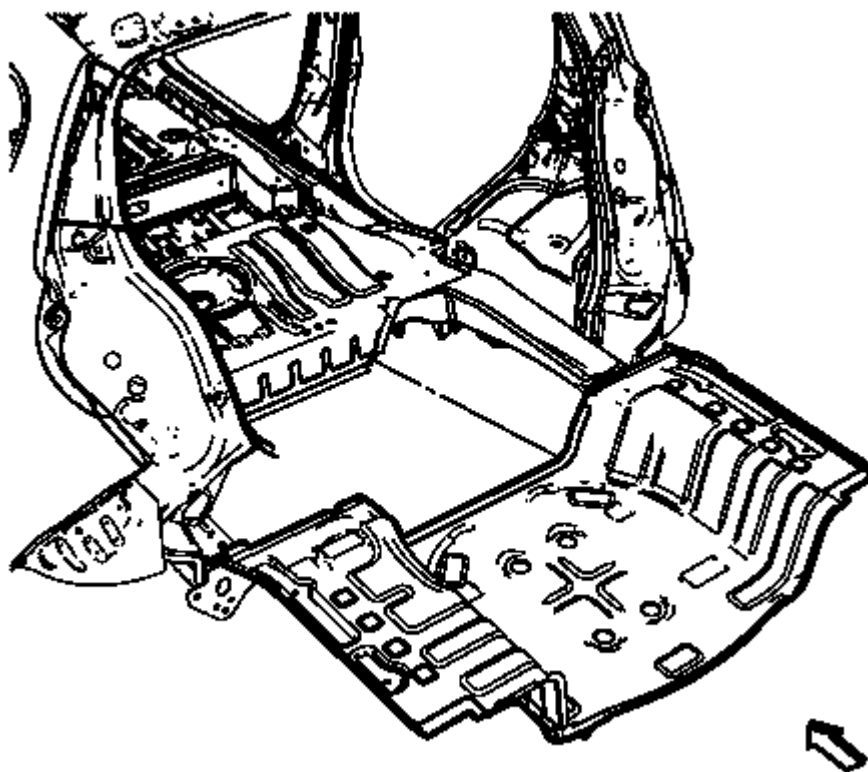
Removing Damaged Rear Compartment Floor Panel
